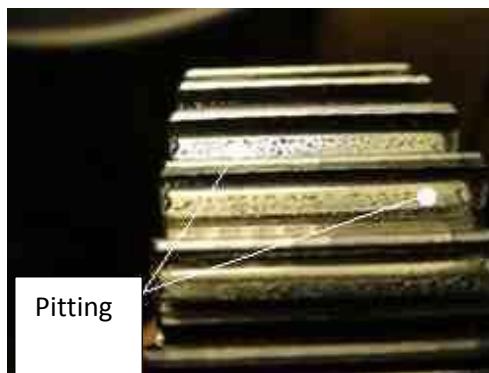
Tooth pitting [Al-Arbi, 2012]
